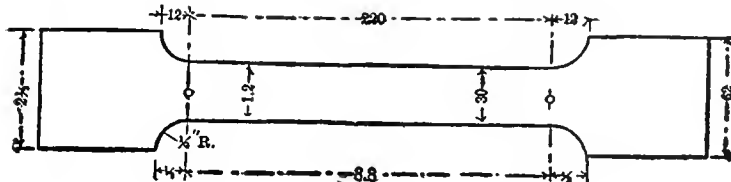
TEST-PIECE FOR FLAT SPECIMENS.
